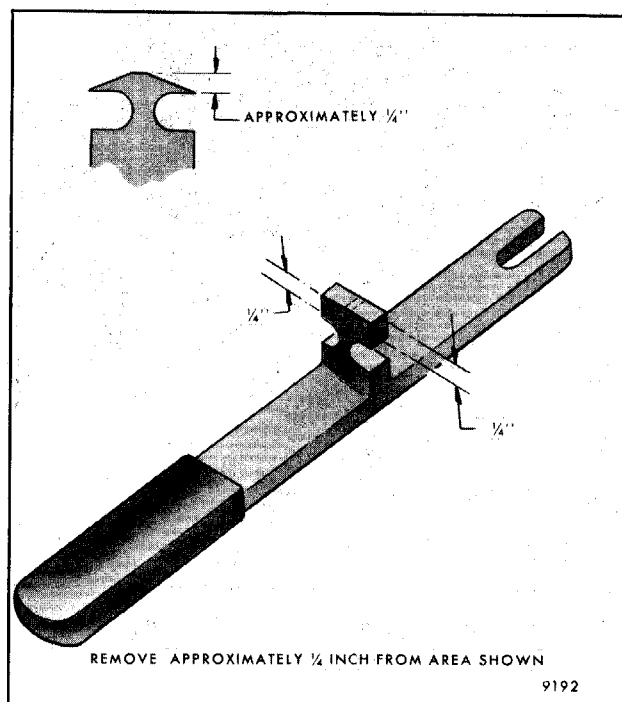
Modified "X" and "H" Torque Rod Tool
